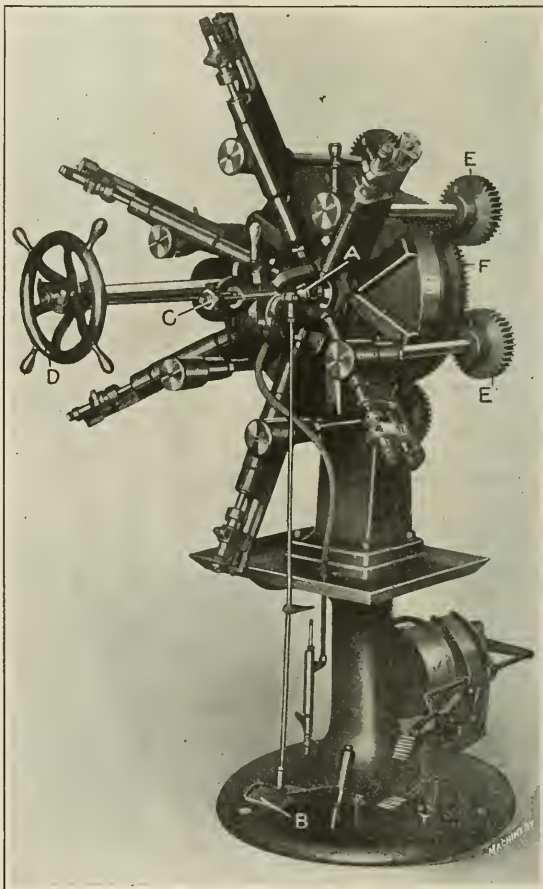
Six-spindle High-speed Drilling Machine for drilling Angular Holes in Bottom Closing Screw
